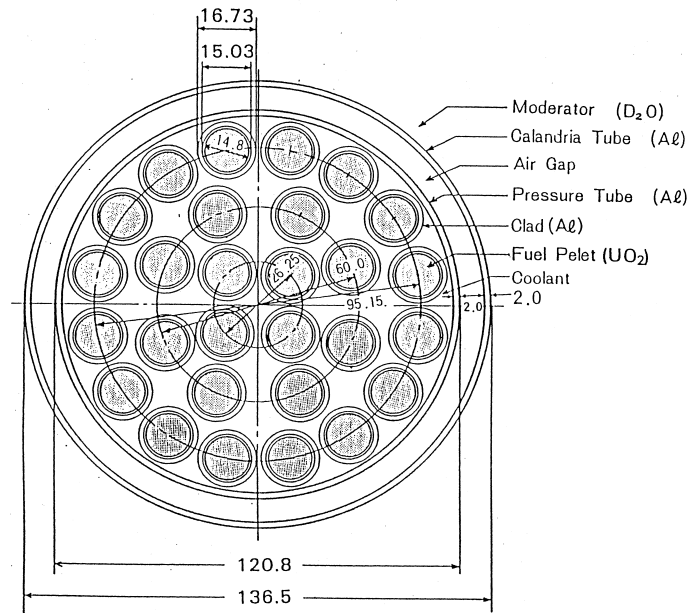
Cross-sectional View of 28-rod 1.2wt%  $UO_2$  Fuel Assembly
